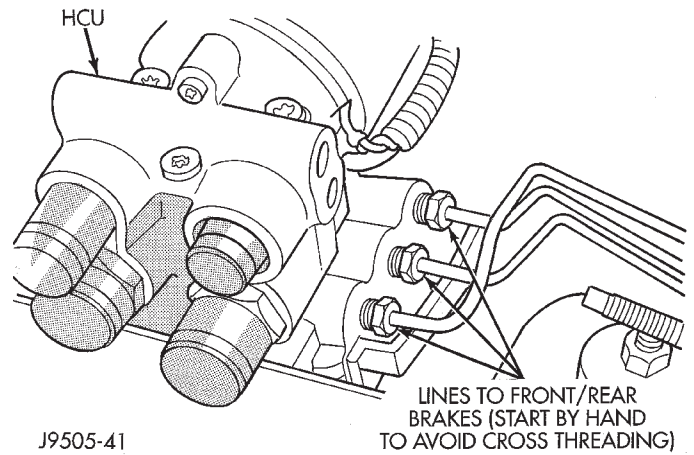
HCU Brakeline Installation (To Front/Rear Brakes)
